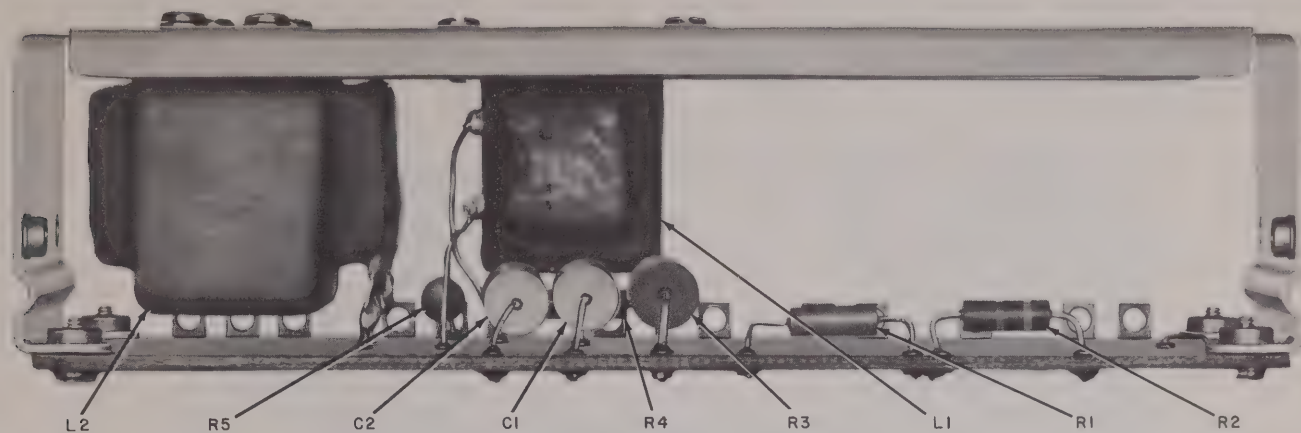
Filter Assembly A1 or A3, Left Side View
